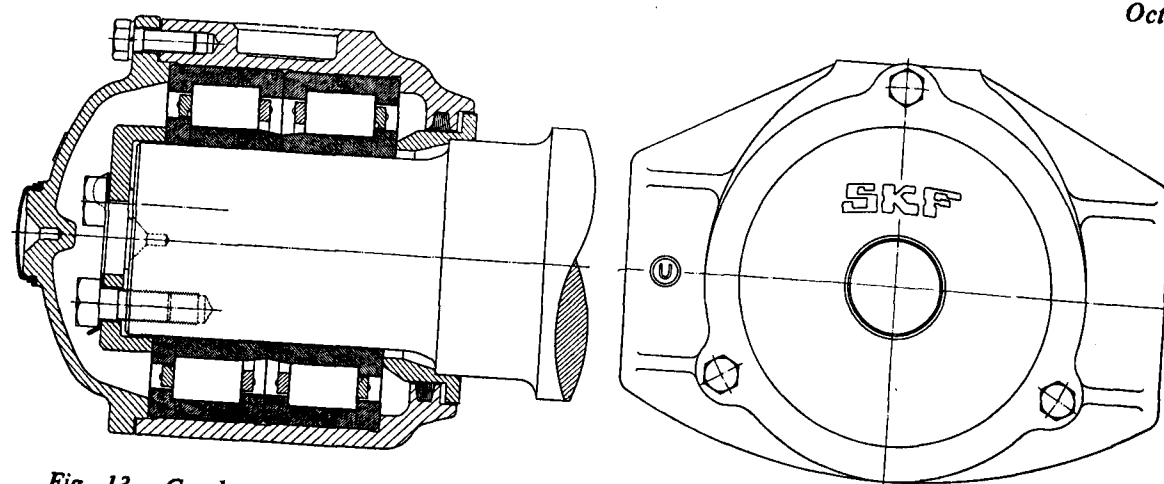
Goods wagon axlebox with cylindrical roller bearings. U.I.C. 130 mm. journal.
